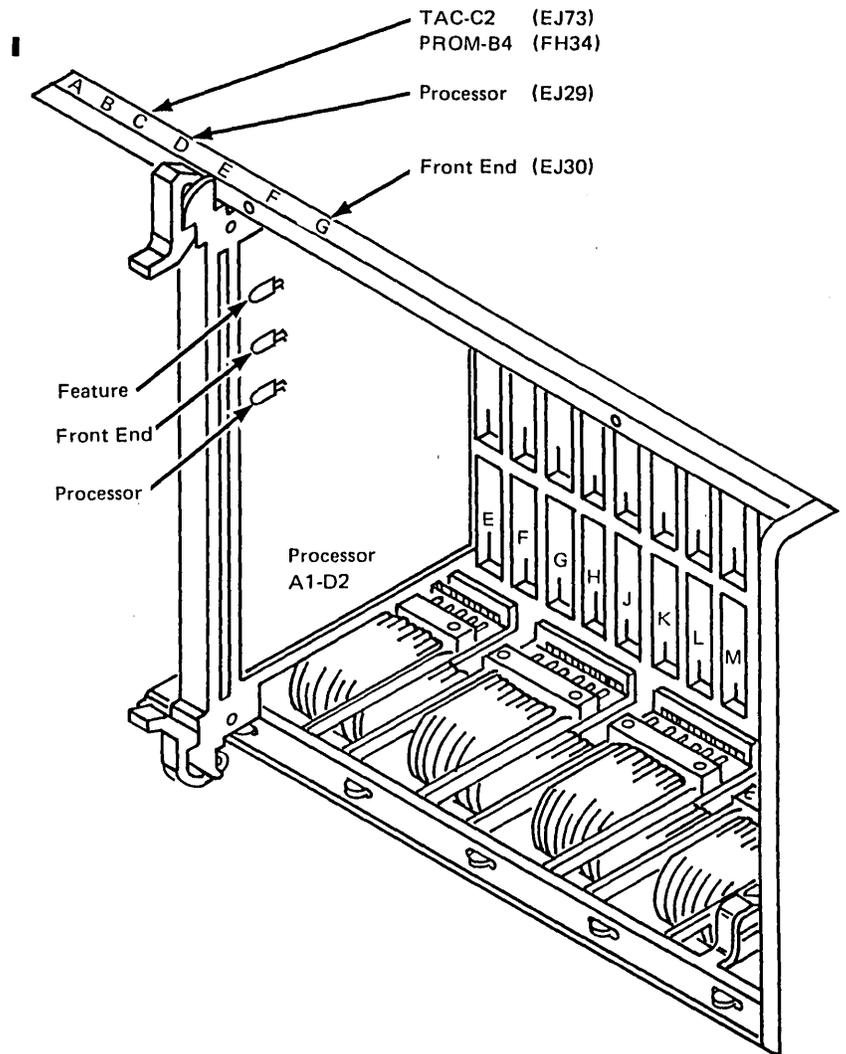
2400-bps Integrated Modem Card LED Indicator and Test Results
